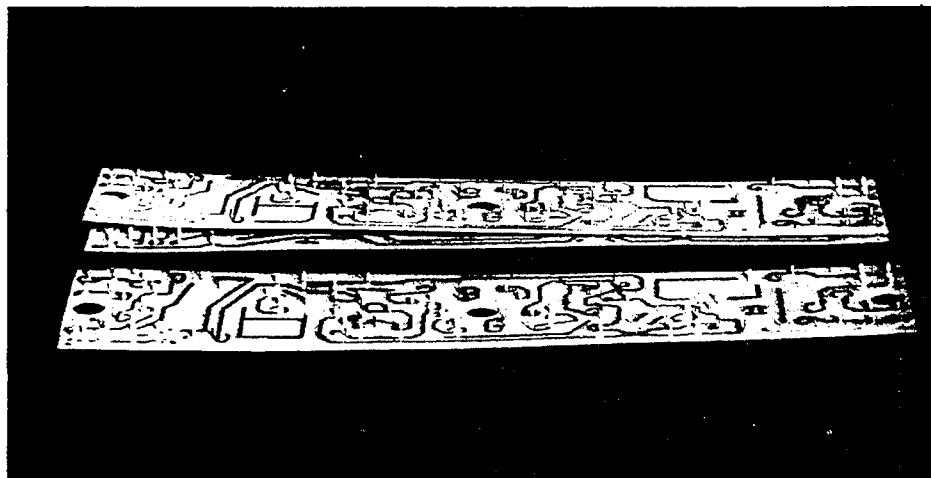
The tabs provide a rather simple approach to multilayer systems. Tabs from the lower layer project past the top surface through clearance holes which also accommodate component leads. The accuracy of tab lifting is such that these boards go together easily.
